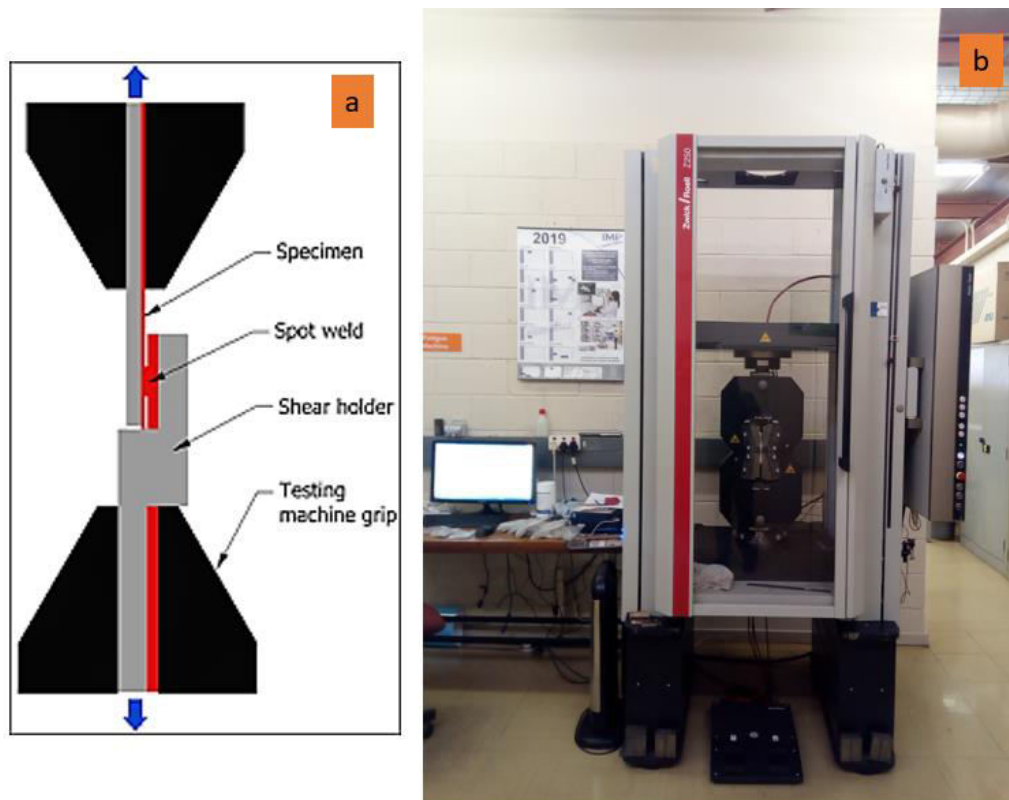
The schematic illustration of the tensile shear (b) Universal testing machine (Zwick/Roell Z250).
